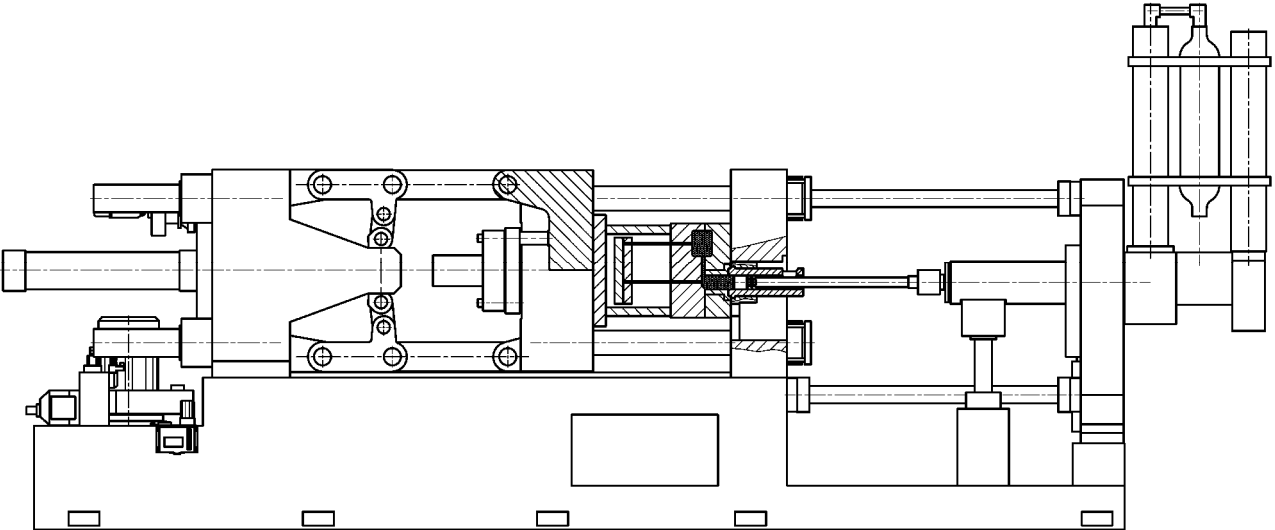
Example of a horizontal cold-chamber diecasting machine (can be manufactured with a horizontal or a vertical die closing system)
